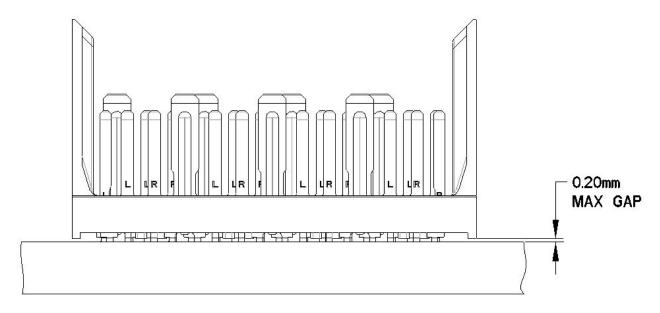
Fully-Seated Inspection Dimension - Backplane Header
